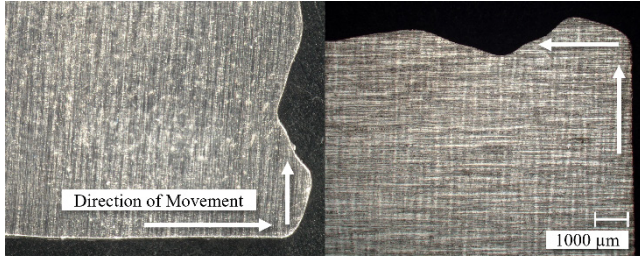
AISI 304 (EN 1.4301) stainless steel rectangle laser cut from sheet metal using our cutting and welding demonstrator. The direction of movement of the cobot used for handling of the processing head is indicated with white arrows. Oscillation of up to 0.89 mm amplitude are observable after change of direction.
